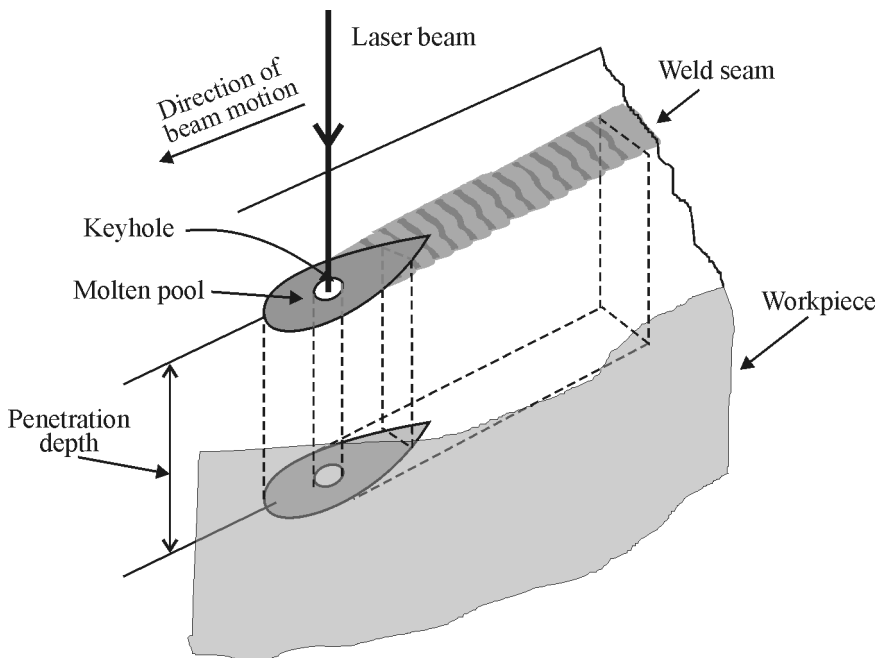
Schematic diagram of the process of keyhole formation and deep penetration welding
